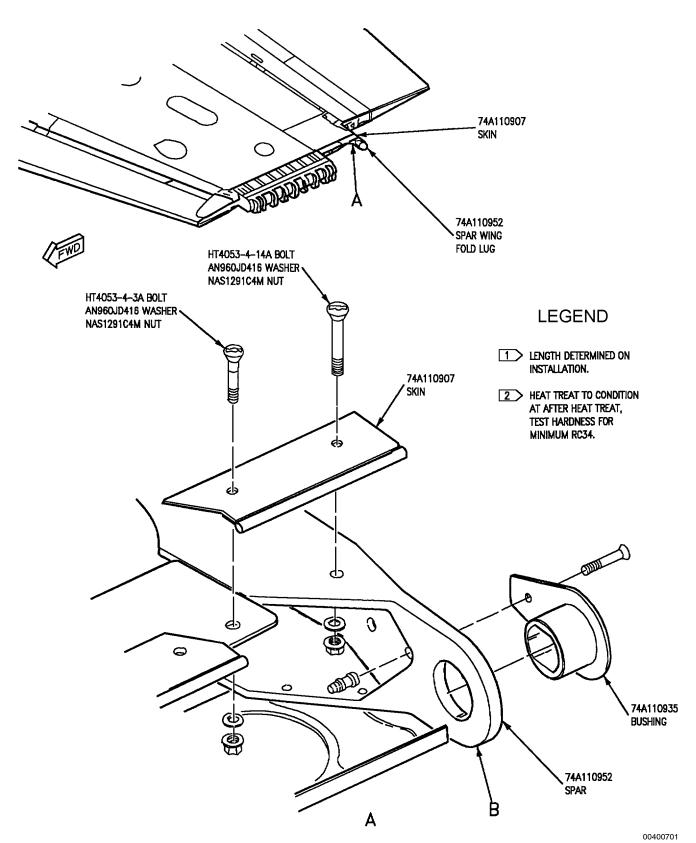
Aft Spar Fold Lug Repair, 161353 thru 161528 (Sheet 1)
